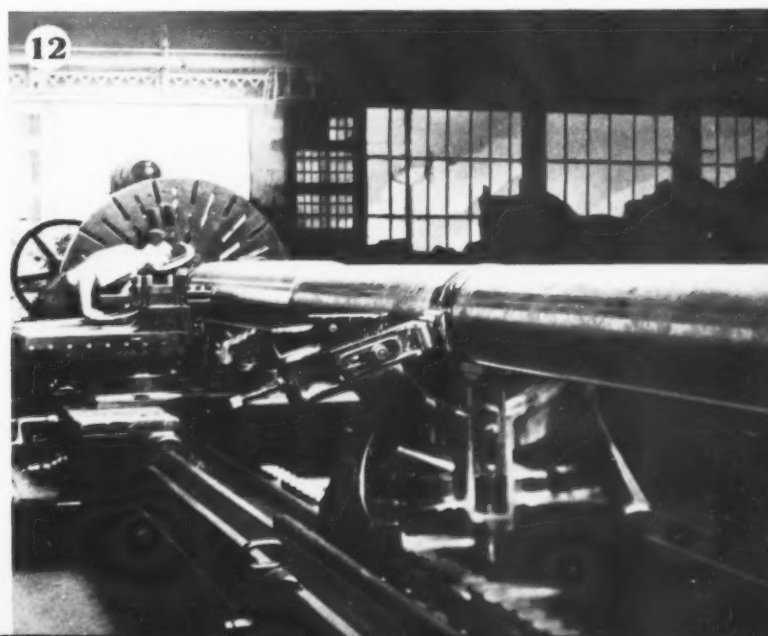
Turning a Bearing on a Propeller Shaft in a Lathe with a Length of 100 Feet between Centers
